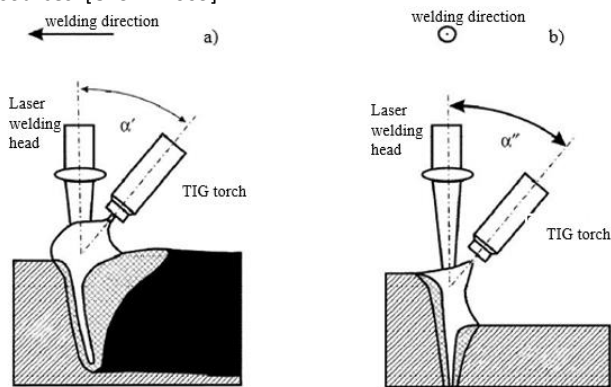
Scheme of serial (a) and parallel (b) hybrid welding. [OLSEN 2009]
